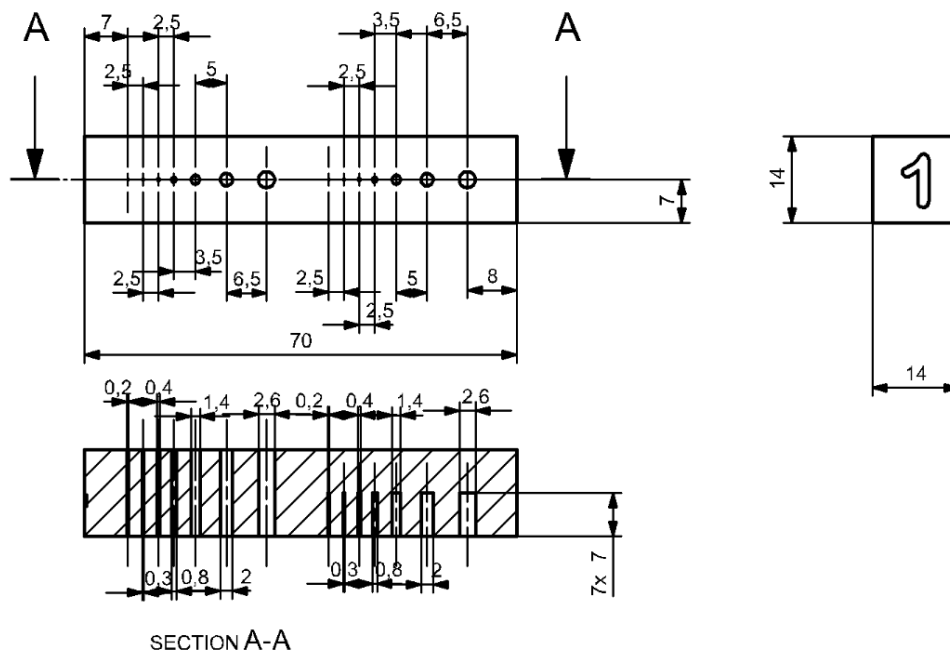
CAD drawing of IN 939 block 1 showing side printed holes with diameters.
